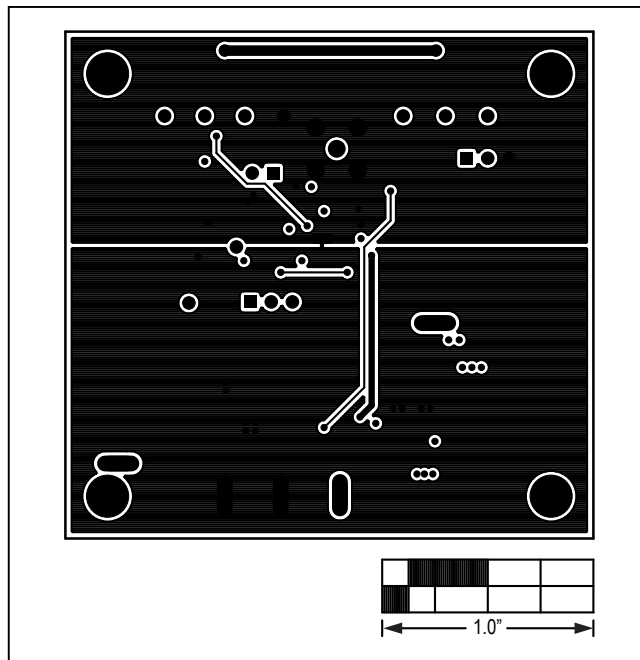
MAX16990 EV Kit PCB Layout—AGND and PGND Solder Side
